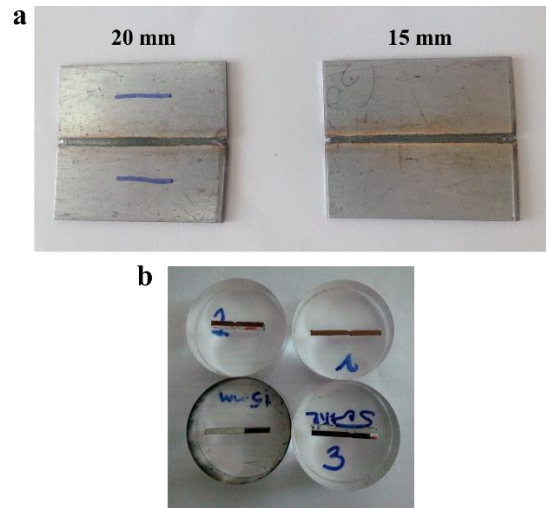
(a) Nd: YAG laser welded samples and (b) metallographically prepared samples.
